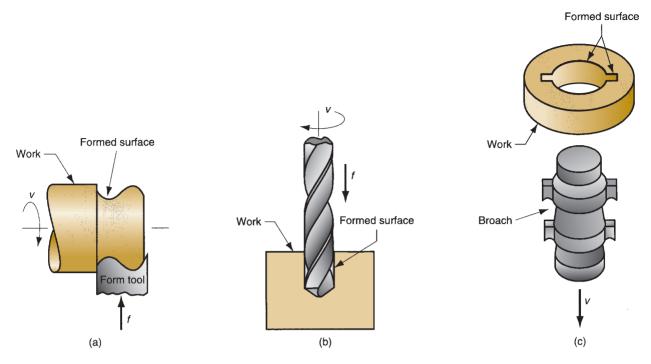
Forming to create shape in machining: (a) form turning, (b) drilling, and (c) broaching.
